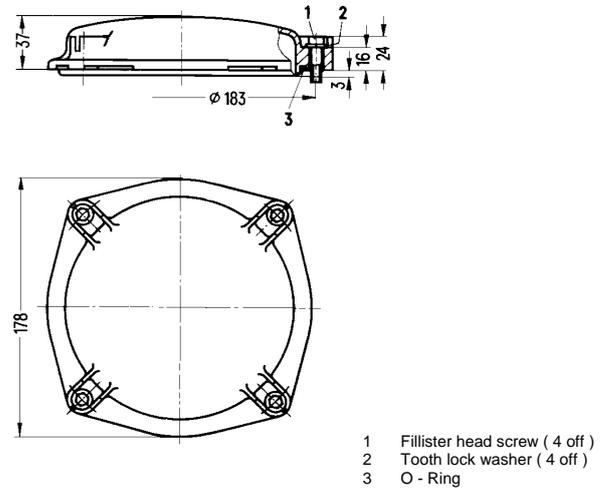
Protective cover to protect the plug assemblies on the actuator with the top of the plug removed
